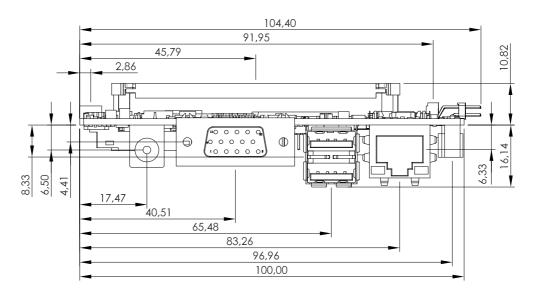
Board dimension layout (Coastline with optional DC/Jack)
